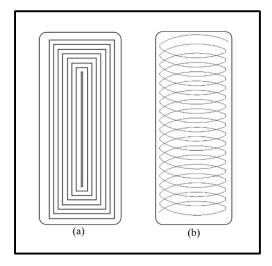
Welding Profile (a) Box, (b) Spiral
